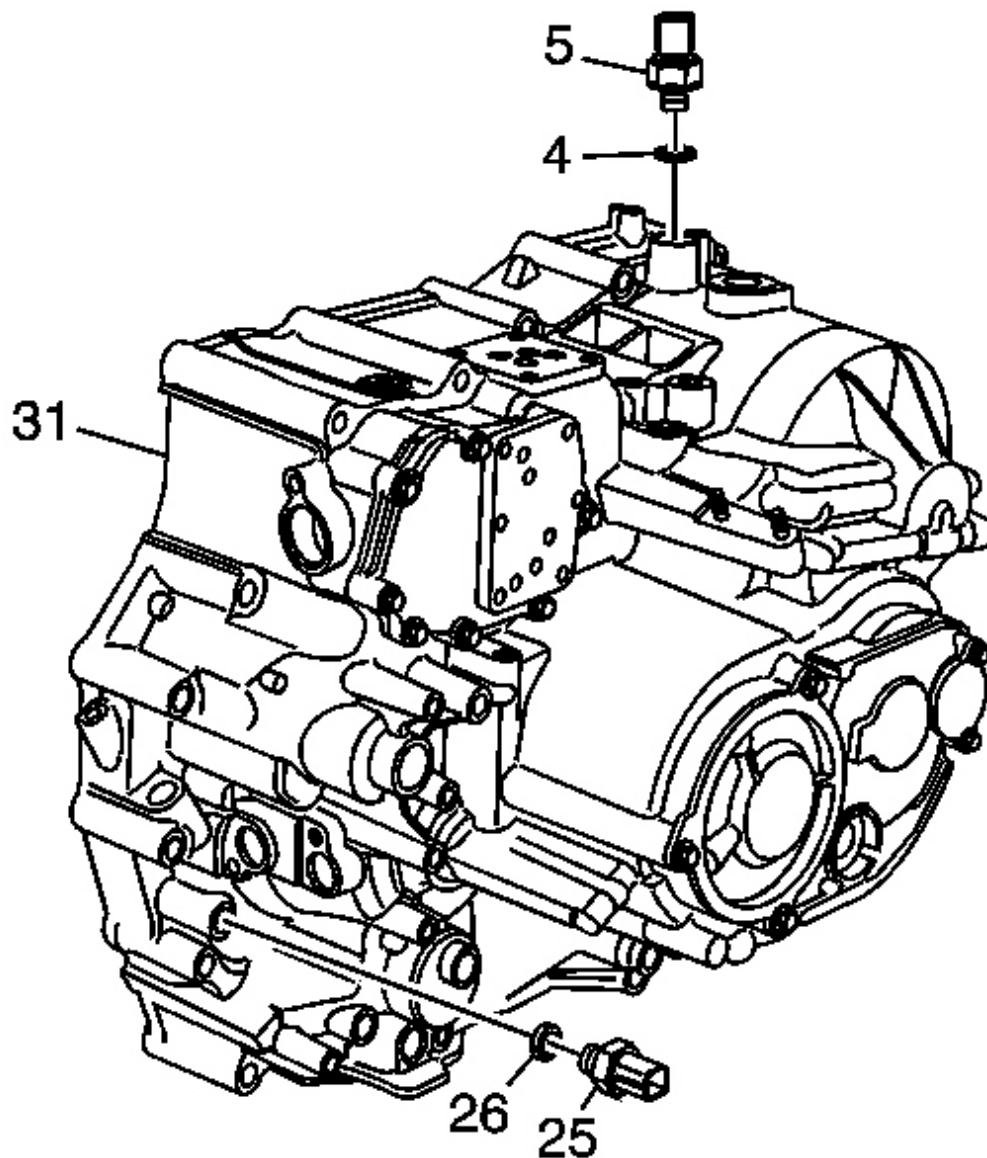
4th Clutch Pressure Switch/Seal & 3rd Clutch Pressure Switch/Seal
